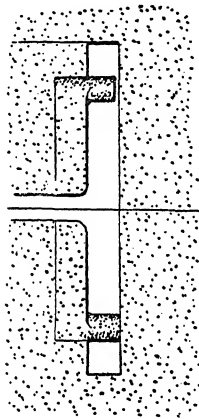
Cores inserted in Drop Print Impressions, bottom and top parts
